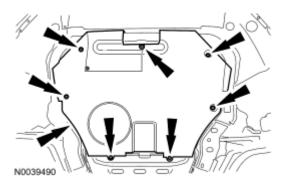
Locating Splash Shield Bolts Courtesy of FORD MOTOR CO.
